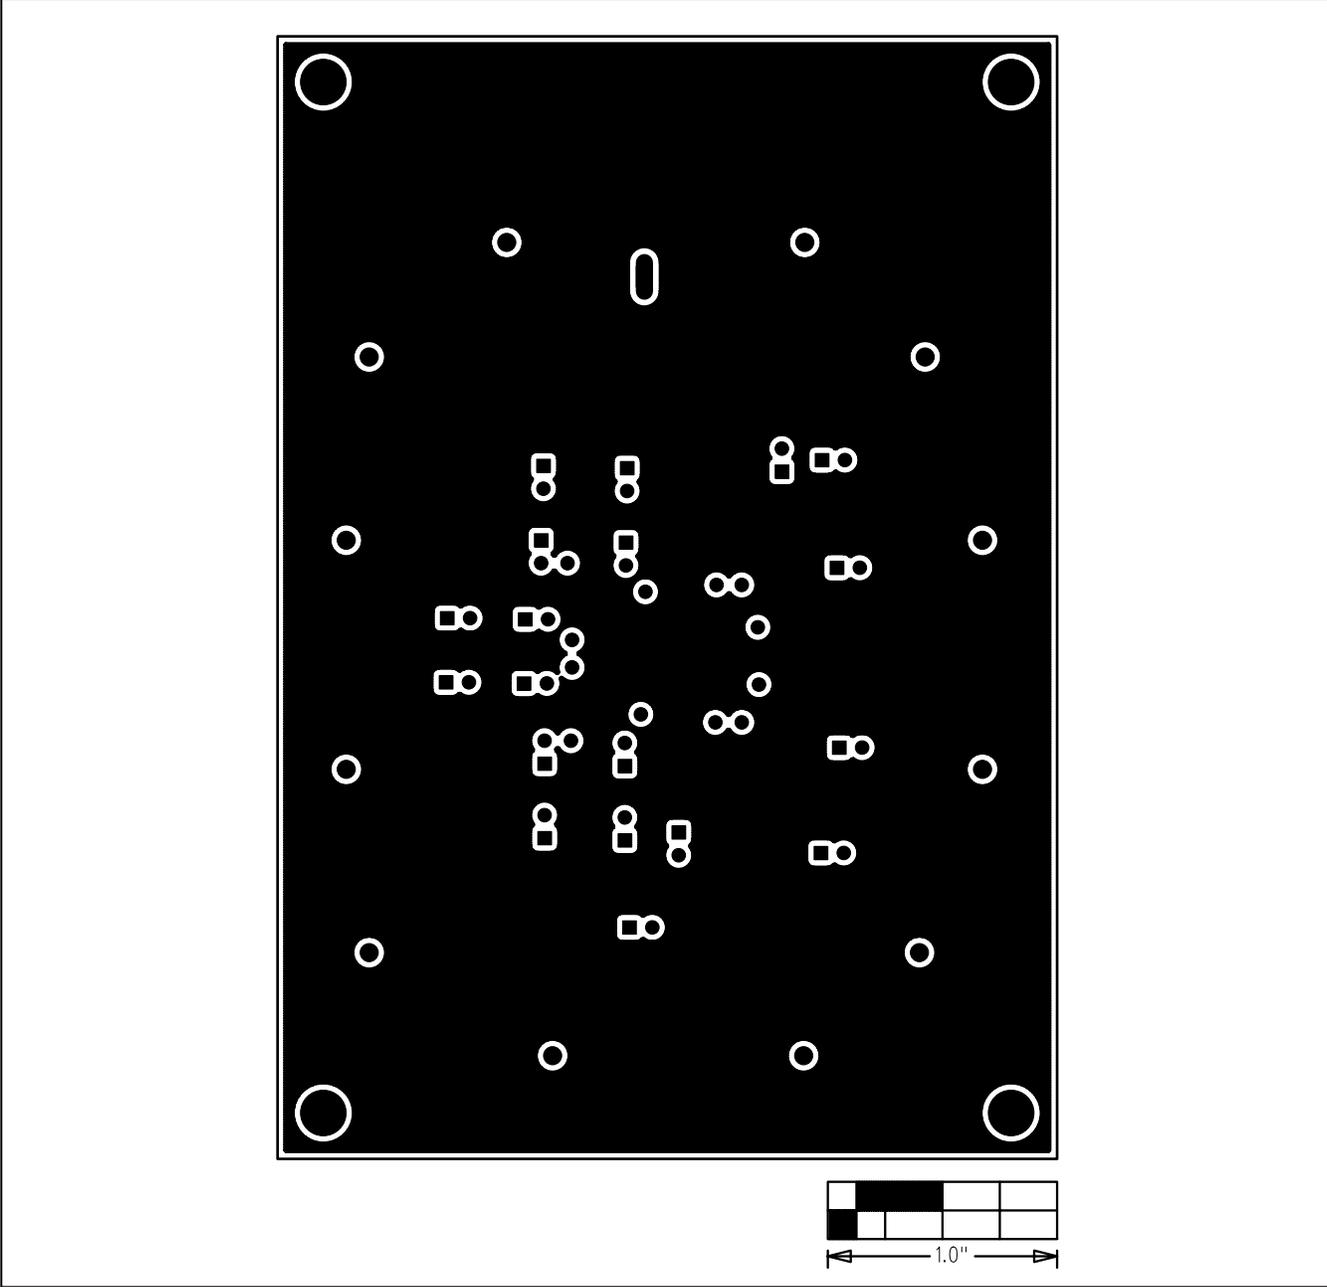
MAX11506 EV Kit PCB Layout—Solder Side
